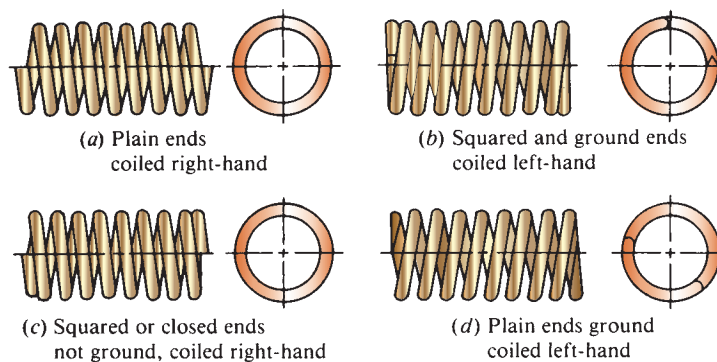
Appearance of helical compression springs showing end treatments
